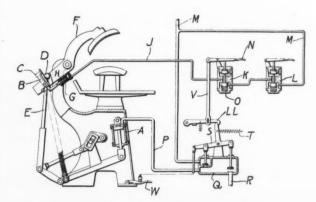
Interlocking hydraulic control for garment press protects the hands of the operator
